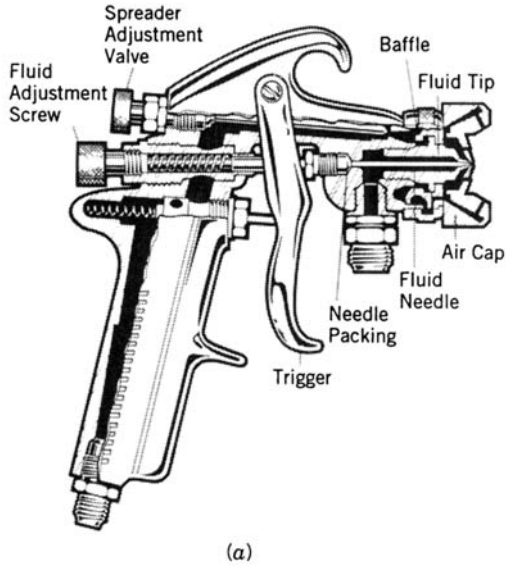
Conventional air atomization spray gun. Source: Courtesy of DeVilbiss Industrial Coating Equipment.
